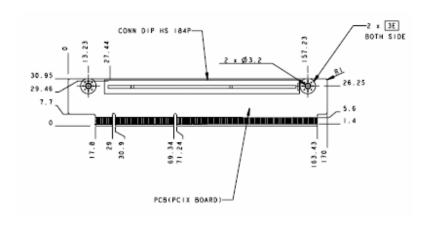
1U PCI-X* Riser Card Mechanical Drawing
